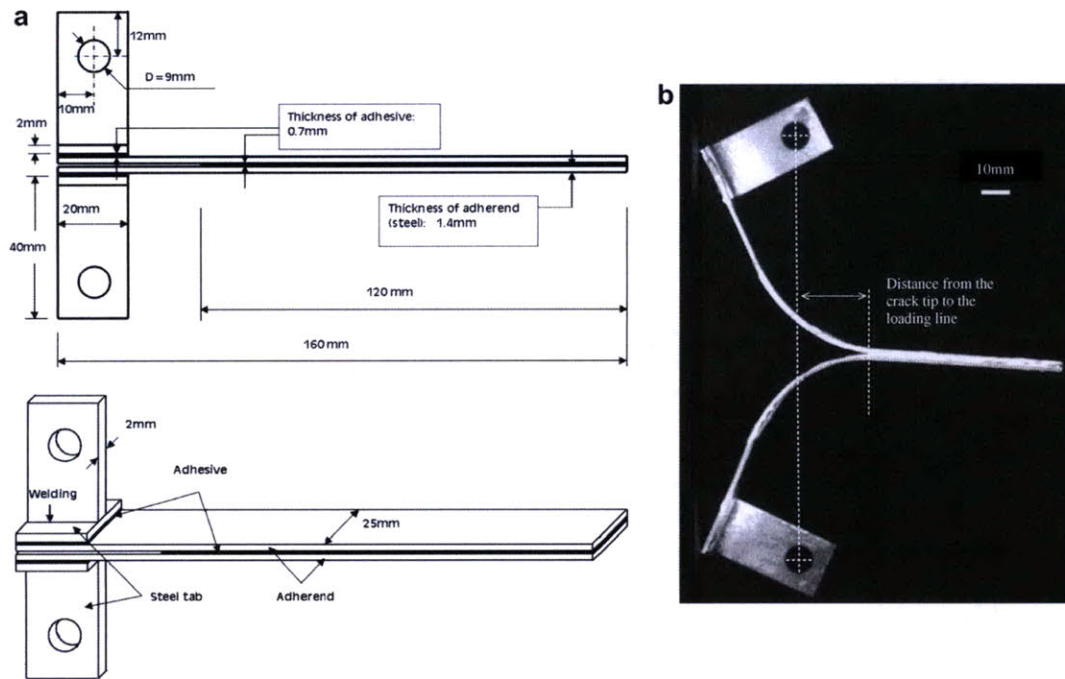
(a) DCB specimen geometry (b) Deformed DCB specimen [18]
